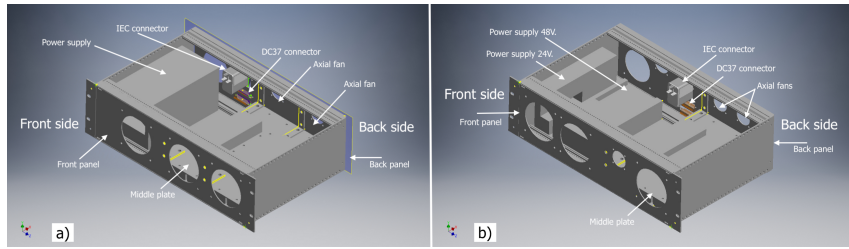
Two types of designed chassis boxes. Each contain: 2 fans, 2 heat sinks, finger guards and L-brackets, DC37 and IEC connectors, middle copper plate, aluminum front and back panels. Additionally, a) 15 SSR, power supply (24V, 20A); b) 10 SSR, power supply (24V, 12.5A), power supply (48V, 10A).
